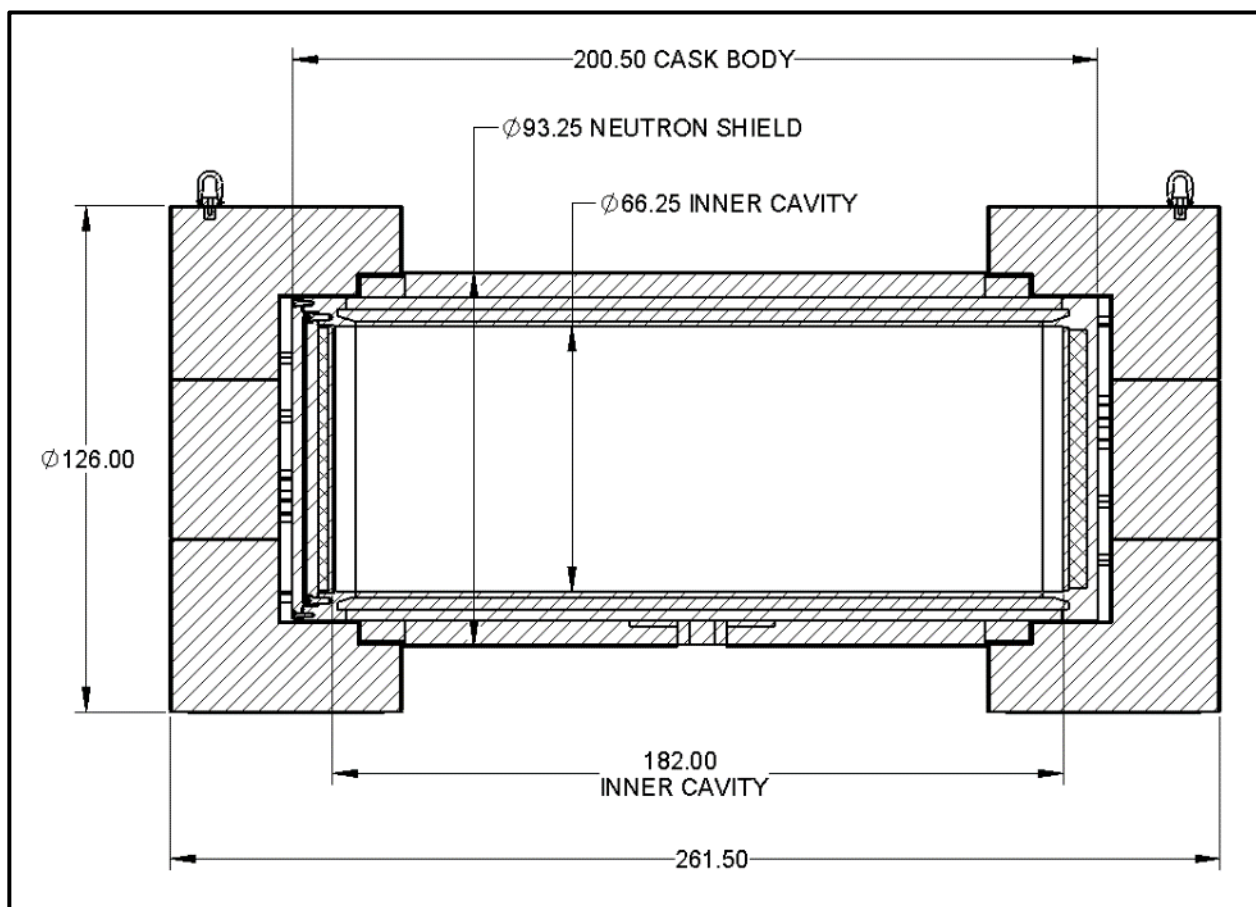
6625B-HB PACKAGE DIMENSIONS
